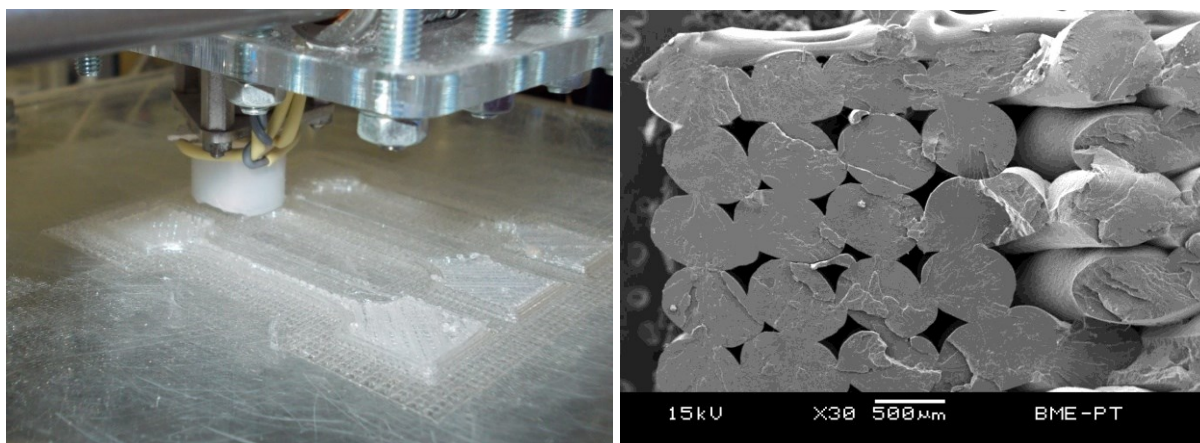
PLA specimens and being prototyped by Fused Deposition Modelling (left) and its fracture surface (right)
